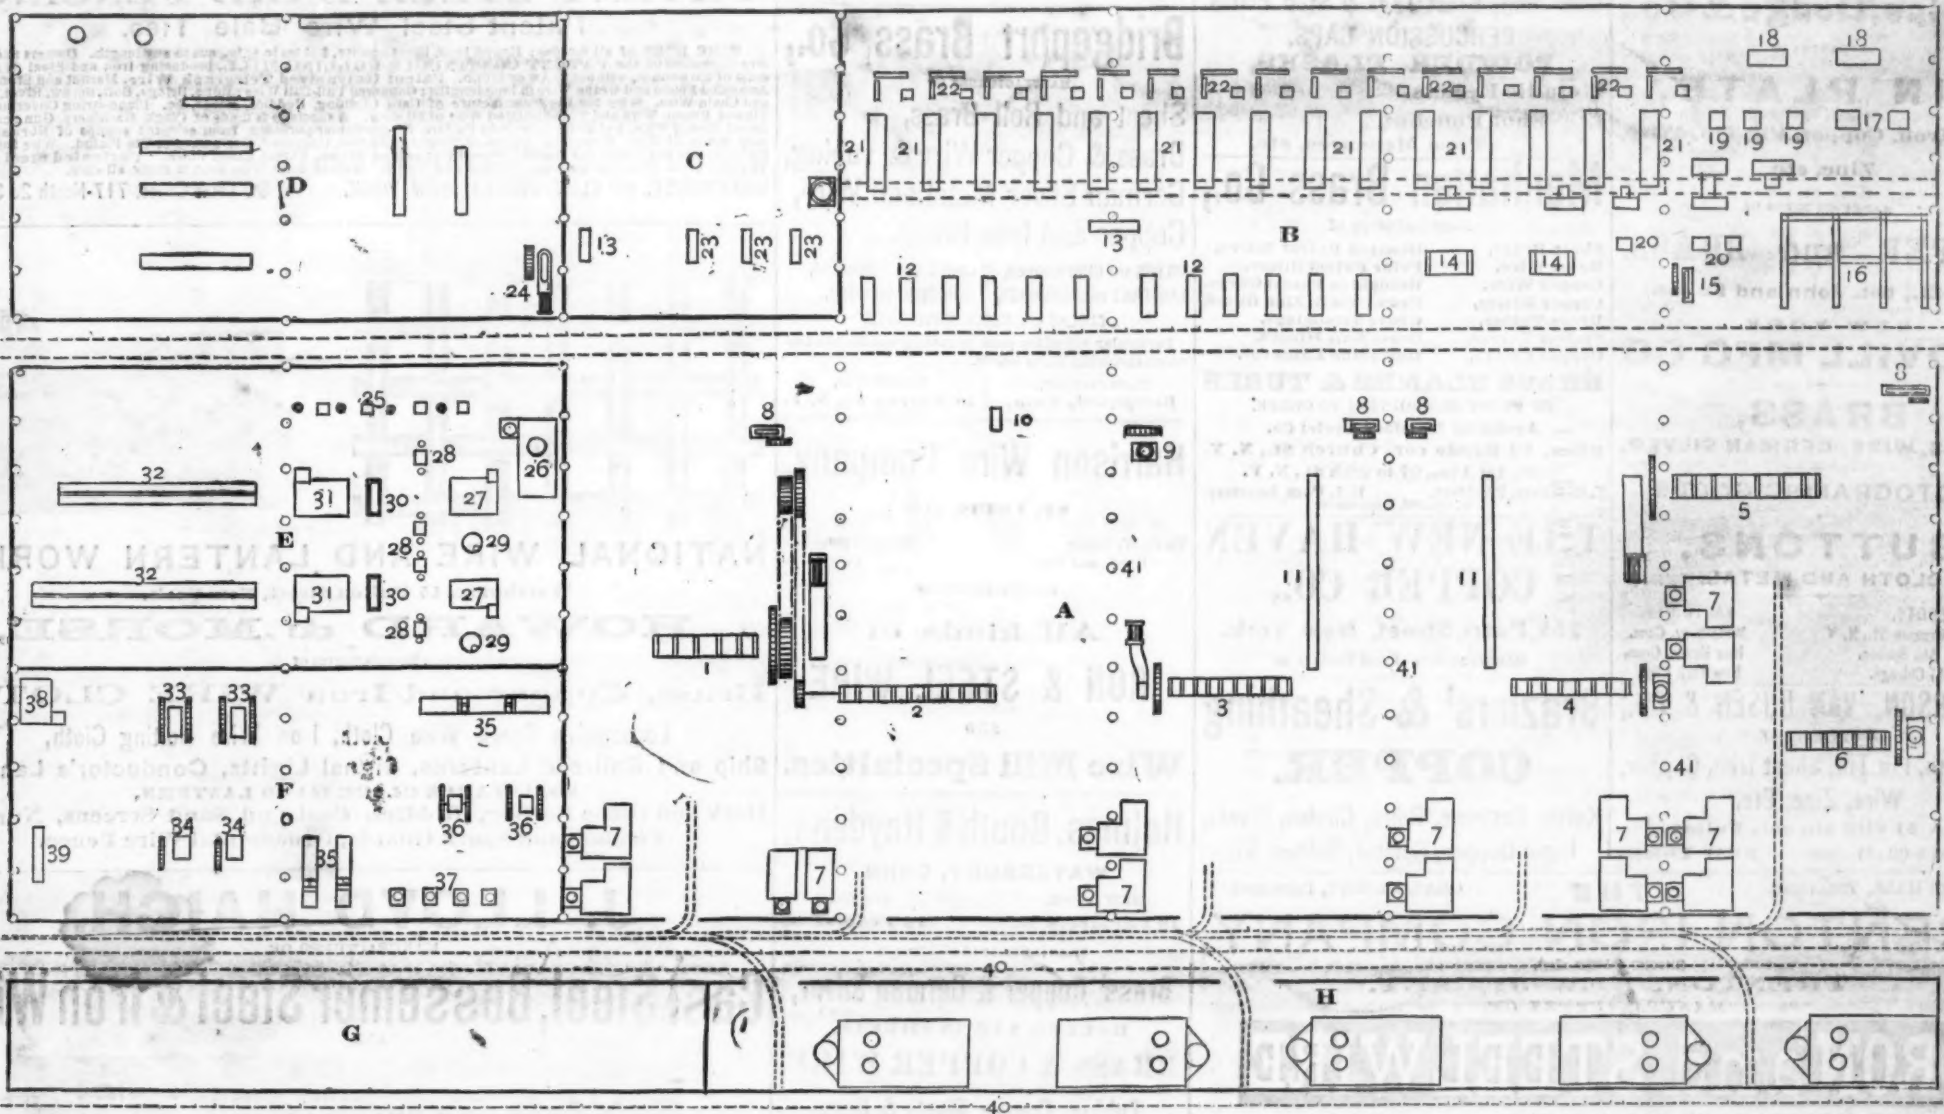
PLAN OF GAUTIER ROLLING MILL.
